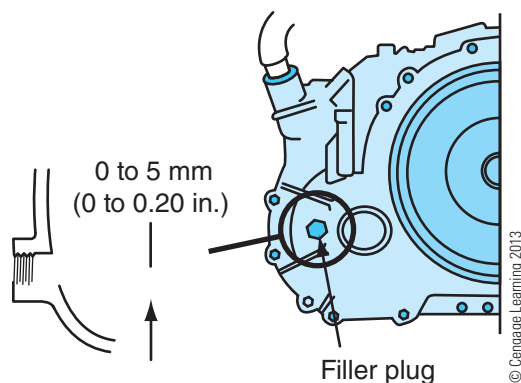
Each manufacturer specifies a distance below the filler plug bore where the fluid level should be.
